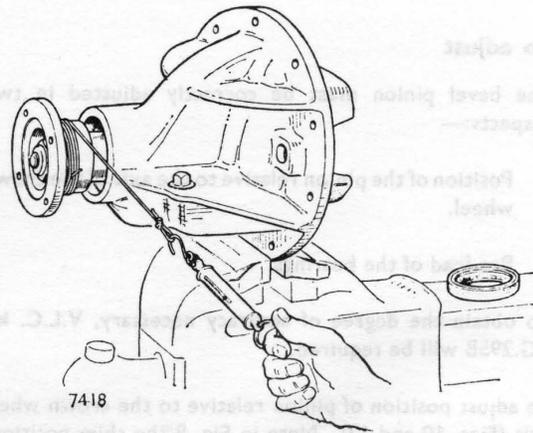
Checking torque loading (pre-load) for pinion bearings
